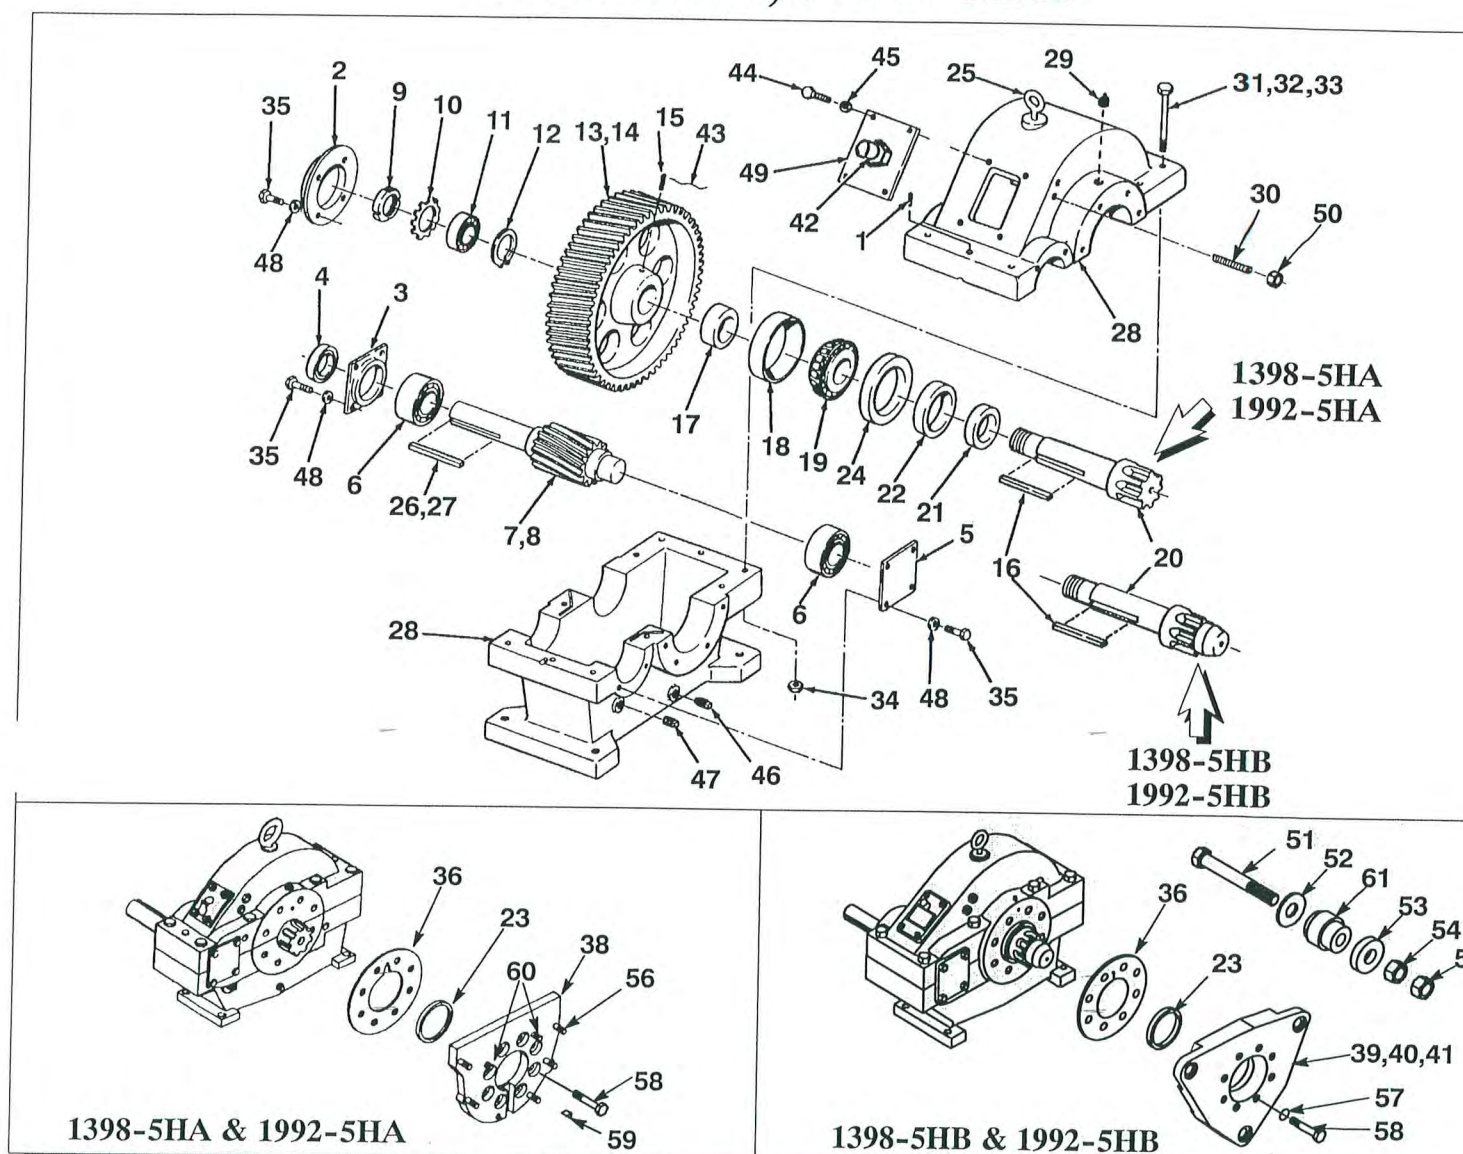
1398-5, 1398-5HA, 1398-5HB, 1992-5HA, 1992-5HB Gearbox Exploded View.
